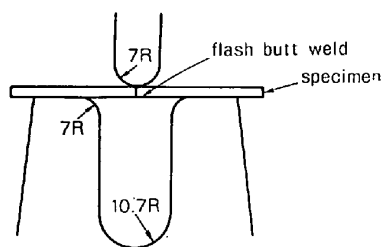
Bending test apparatus for flash butt welds.
